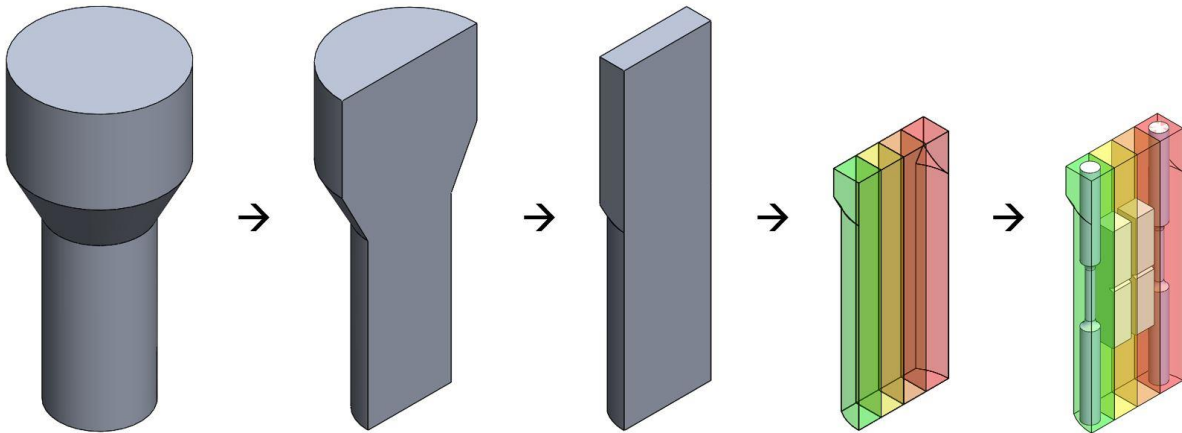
Tensile and Charpy specimen extraction from mechanical mold casting
